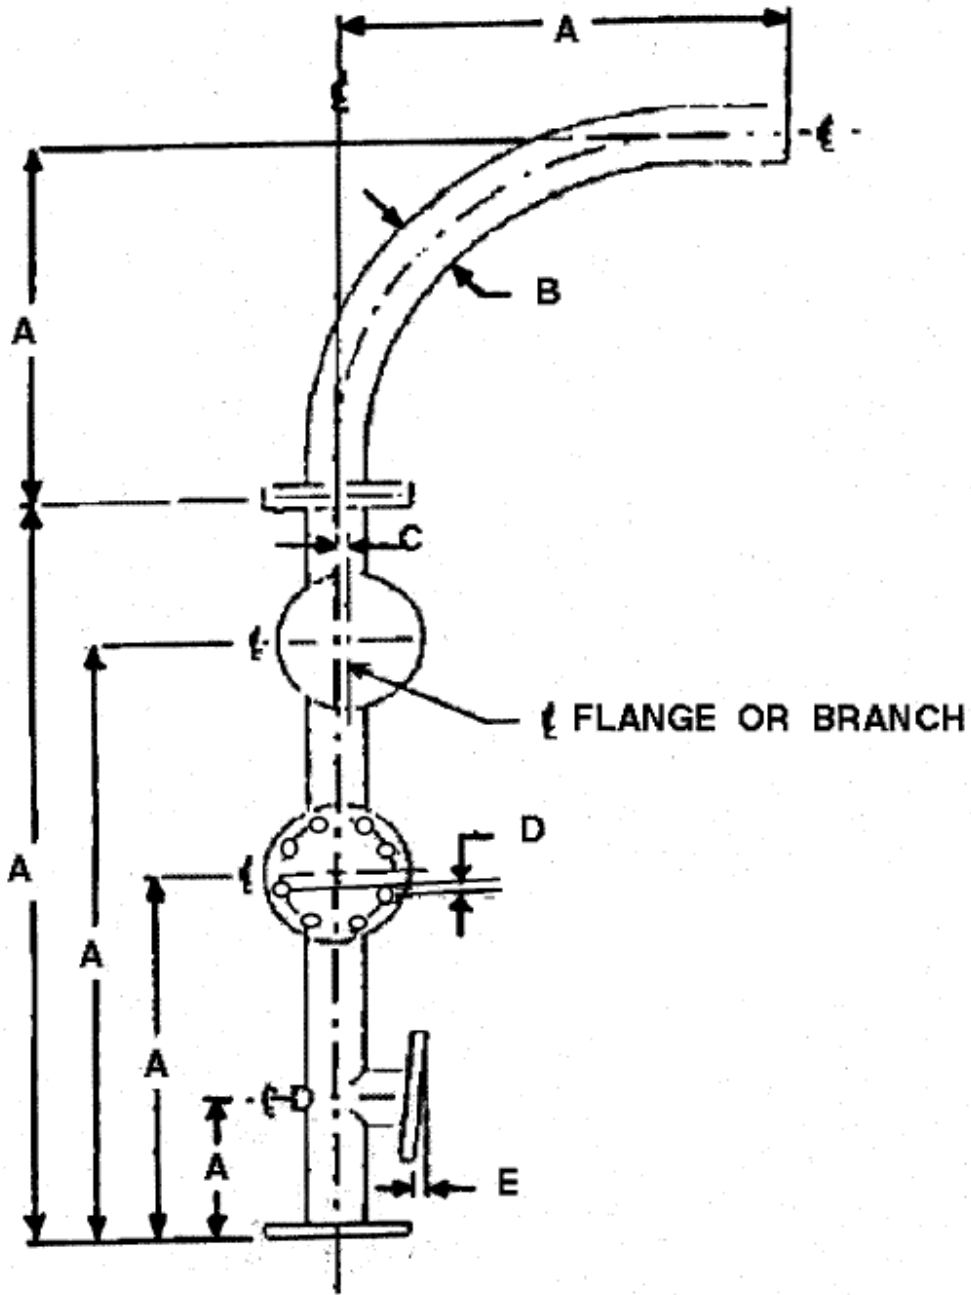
Dimensional Tolerances for Fabricated Pipework
